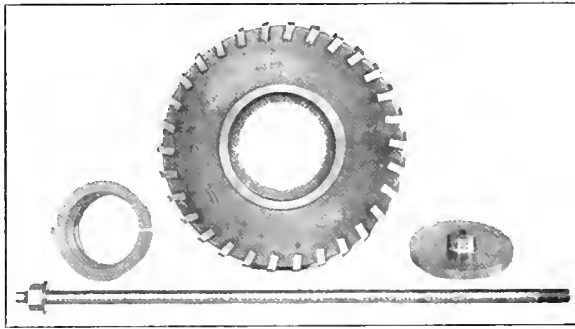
Brown & Sharpe Quick Releasing Face Milling Cutter
